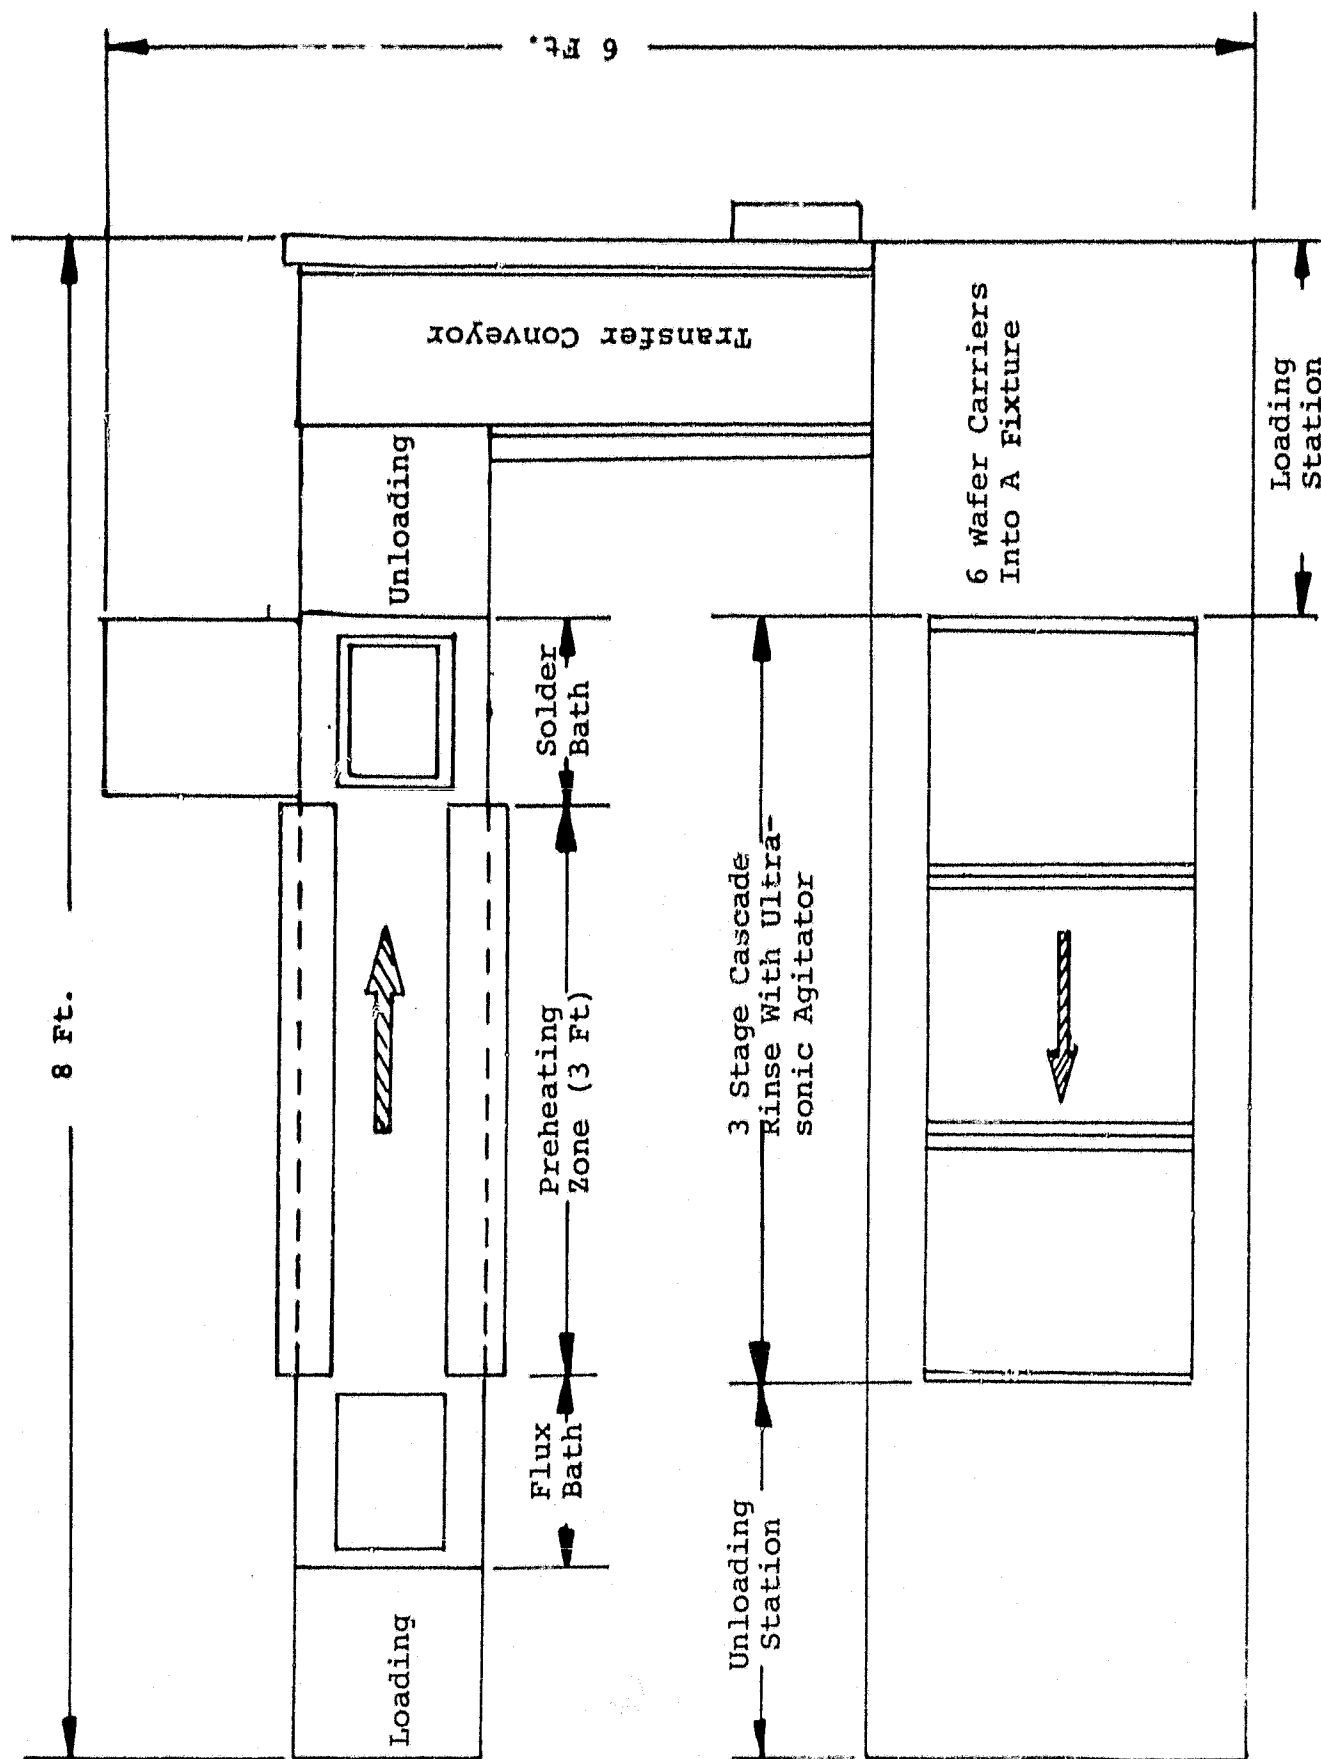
CONCEPTUAL SOLDER COATING AND FLUX REMOVAL SYSTEM (3,600 wafers/min.)
